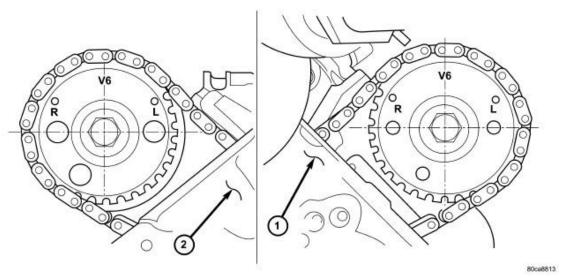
CAMSHAFT SPROCKET V6 MARKS (#1 TDC, Exhaust stroke) Courtesy of CHRYSLER LLC
